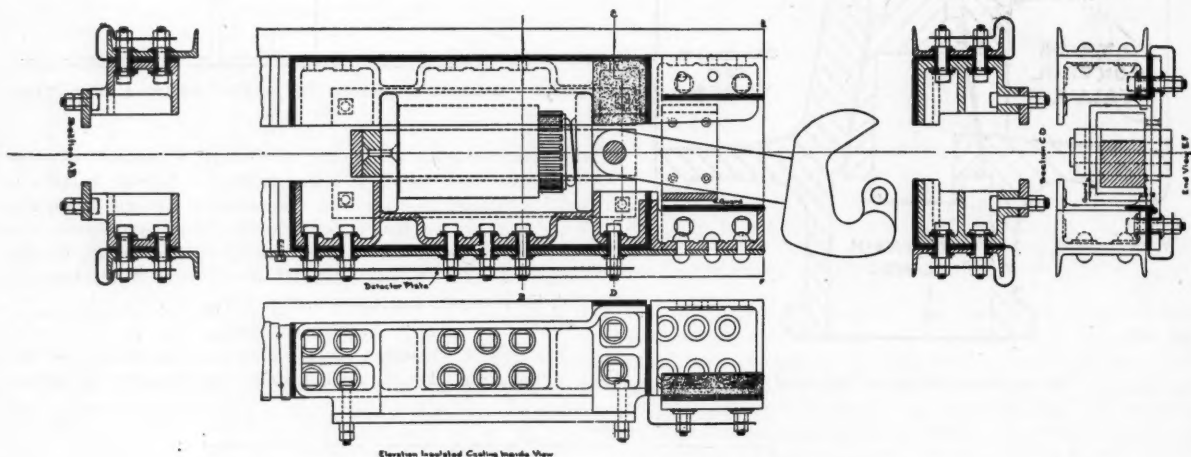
Cross Section of Drawbar Housing, Showing Fibre Parts.
